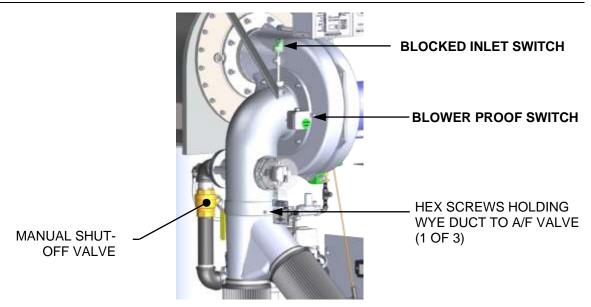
Blower Proof & Blocked Inlet Switch Locations – BMK5000 & 6000
